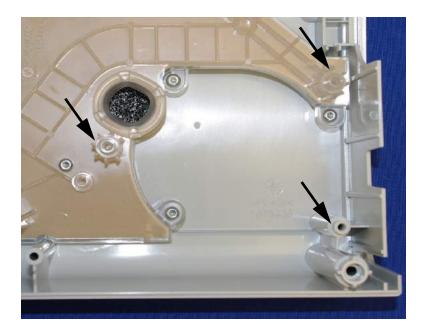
BLOWER BOX MOUNTING LOCATION
